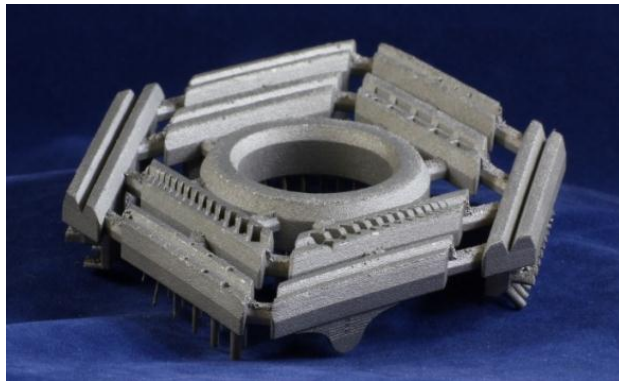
downskin-surface of the test-specimen produced by LBM after support-removal
